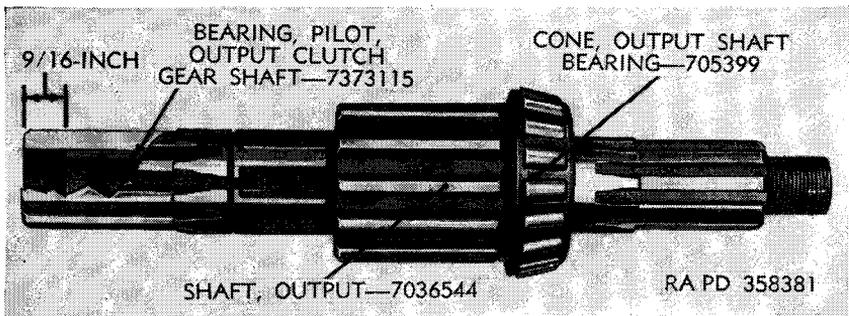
Proper position of output clutch gear shaft pilot bearing.
